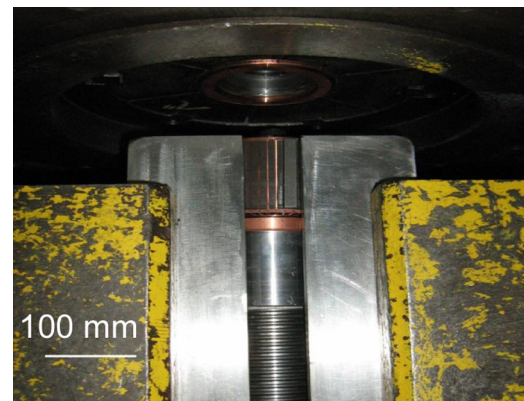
Top view of welder tooling with rotor just before clamp closed, end ring gripped in spindle collet.
